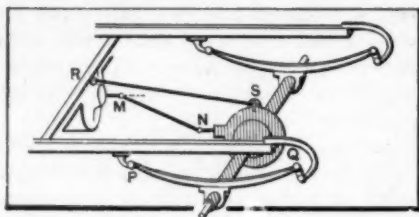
Perspective view of Fig. 12 showing the attachment of the single distance rod which is placed as far back on the axle casing as possible in order to obtain the greatest amount of leverage
